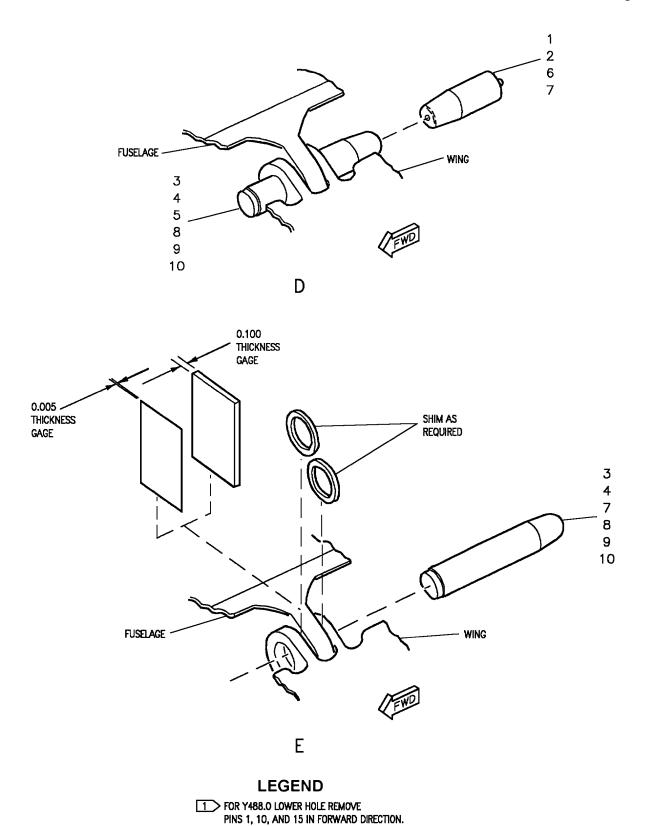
Inner Wing Removal and Installation Pins (Sheet 3)
